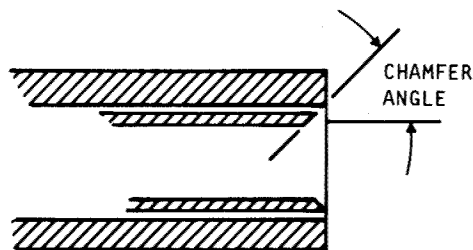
Illustration of inner-post chamfer angle in a concentric-tube element.
